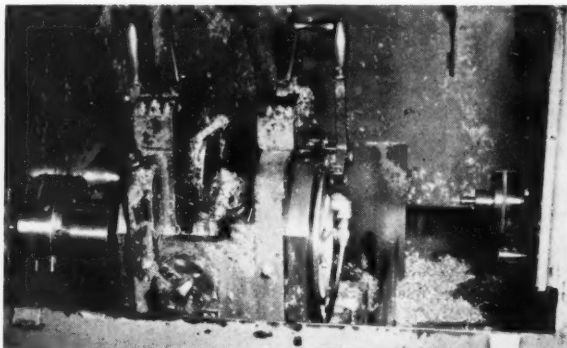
Station 2 of Heald Double End Bore-Matic is shown at right.
